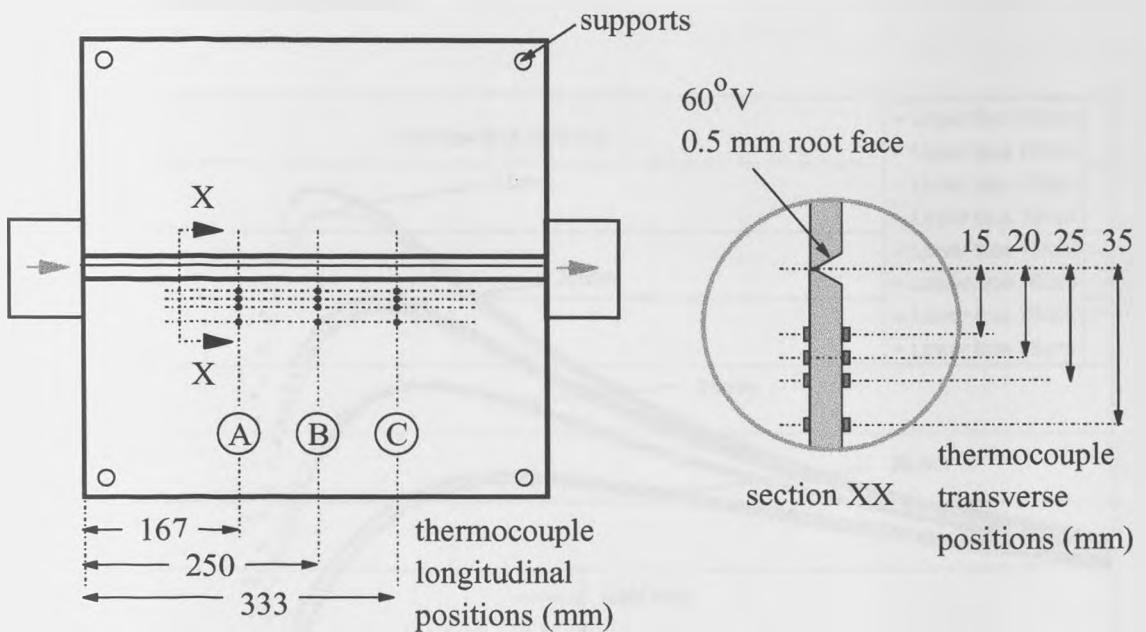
Thermocouple positions and weld prep dimensions
